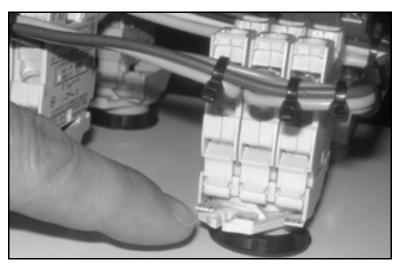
The locking ring shown holds the body of the switch to the front section.
